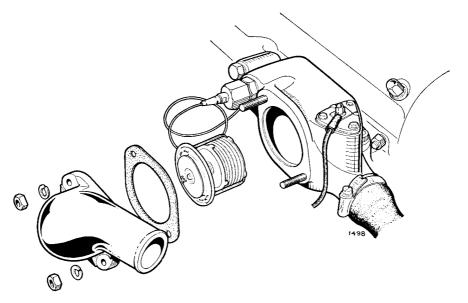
Exploded view of thermostat and housing (3.4 litre shown).
